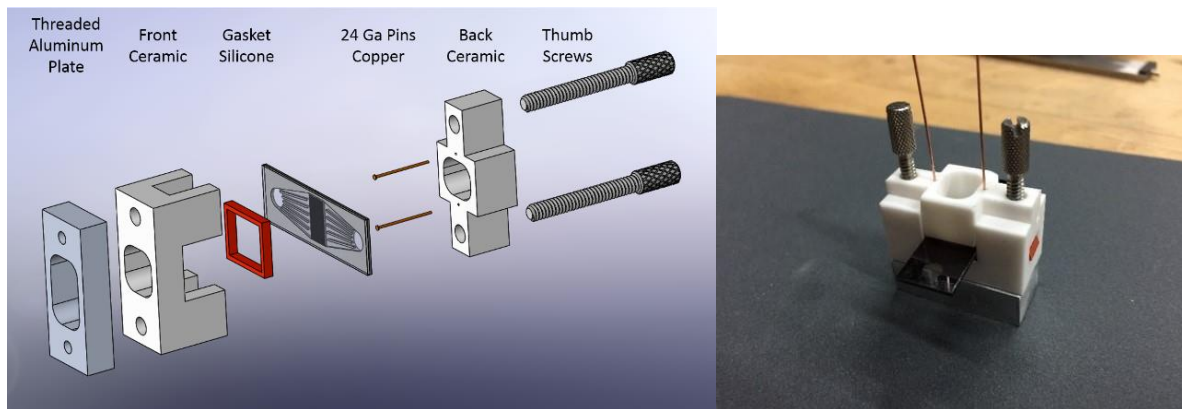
Left solid model of electrical connection to test piece; Right: Assembled test piece in electrical harness [9]
